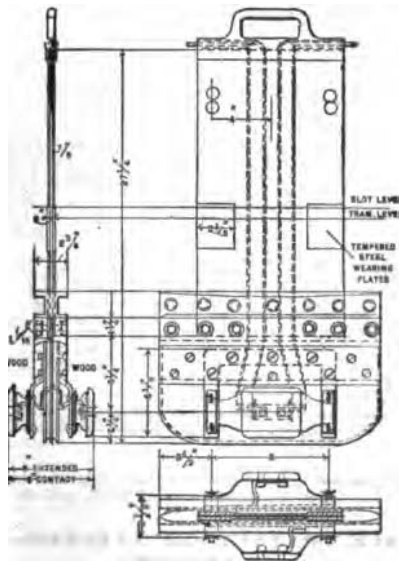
Section, Side, and End Elevation of Plow, New York, 1897/99
